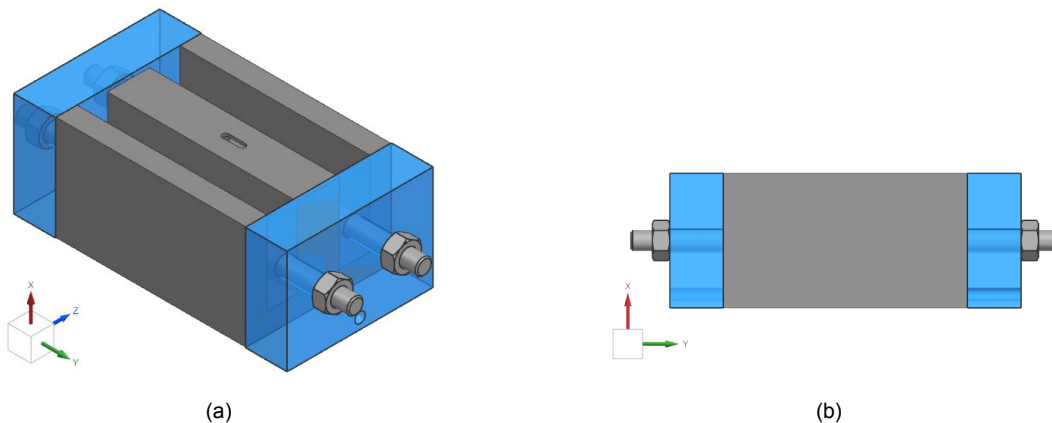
Stator core clamped using aluminum plates (in blue) and threaded rods.
